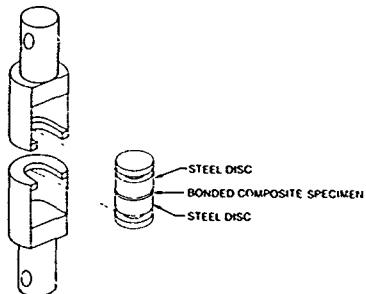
Morton Thiokol Direction 3 Tension Testing Fixture
